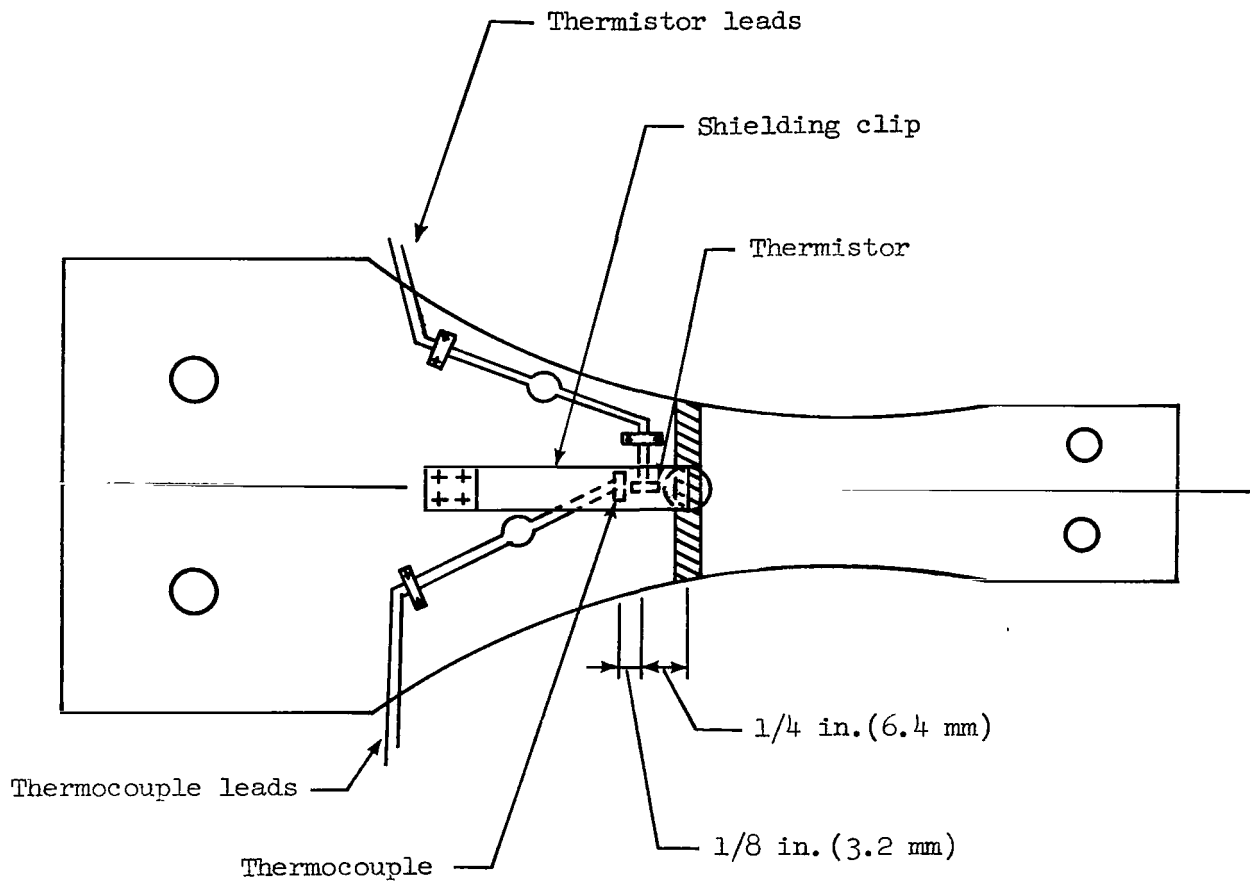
Location of thermistor, thermocouple, and shielding clip on bottom surface of specimen.
